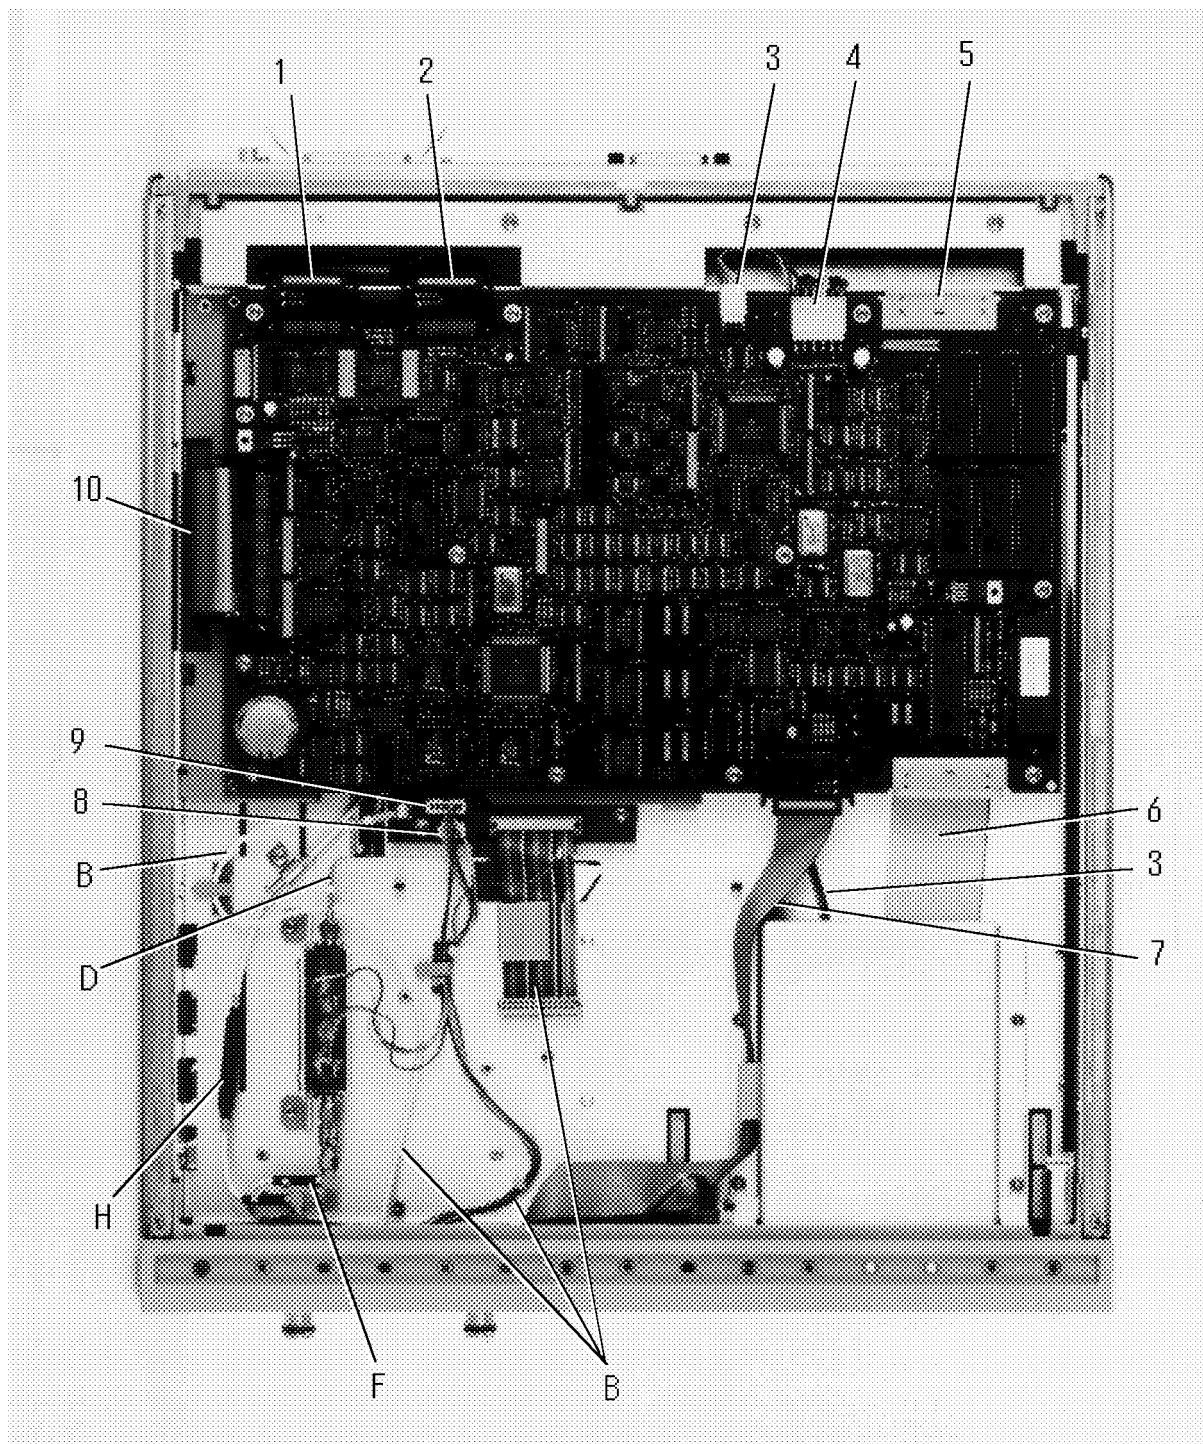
Bottom View 2 (RF Cables, and Wires)
